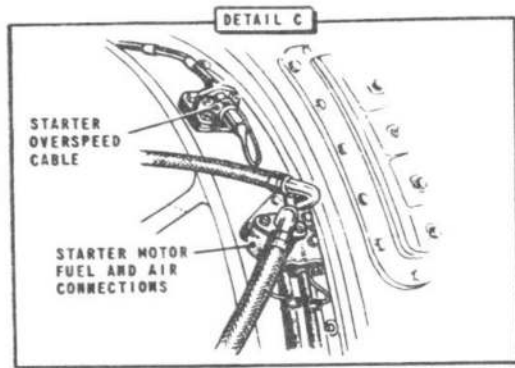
No.2. E.C.U.-REMOVAL AND ASSEMBLY (1)
